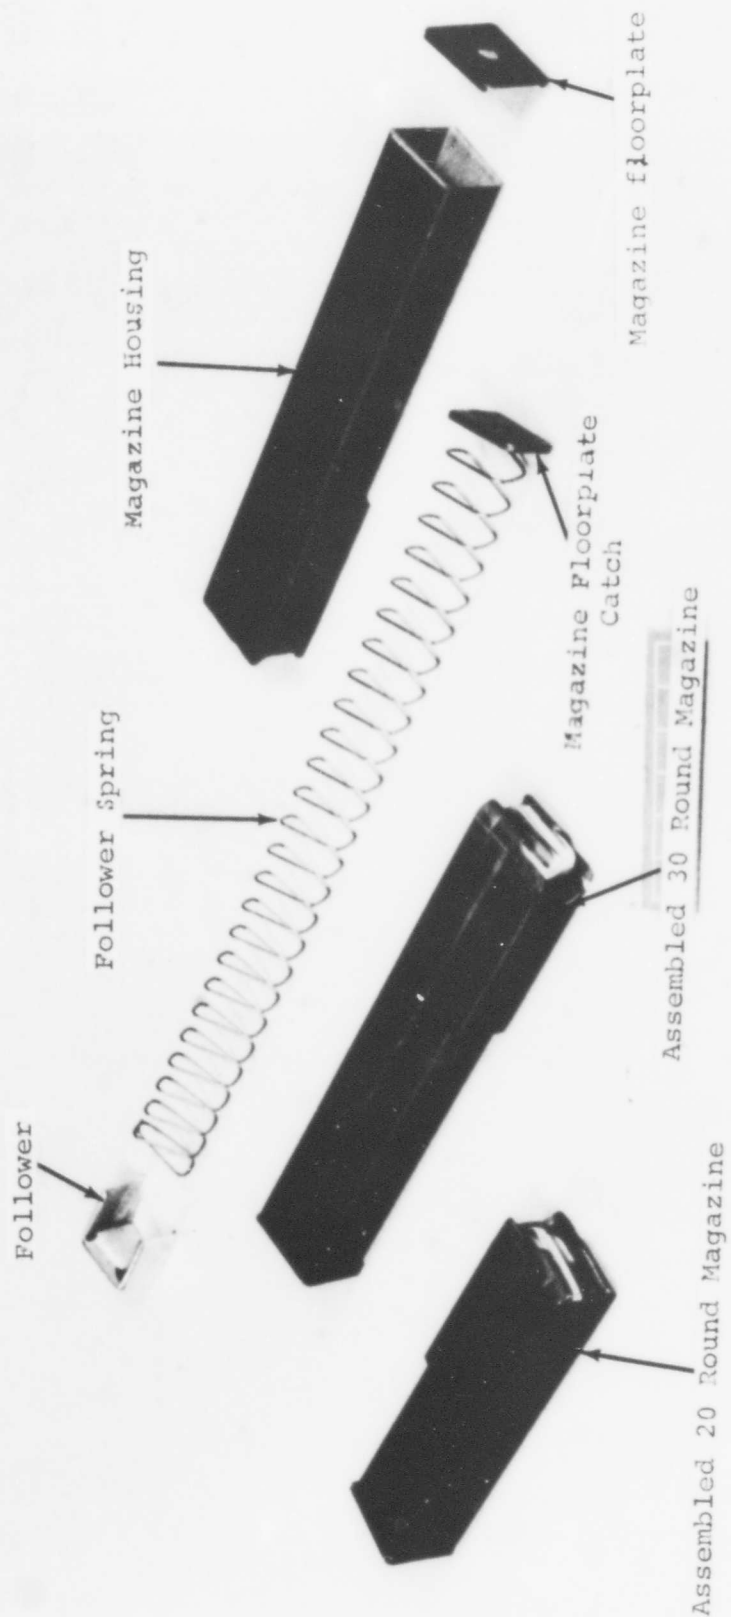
Magazine assemblies and components (30 round magazine disassembled),
